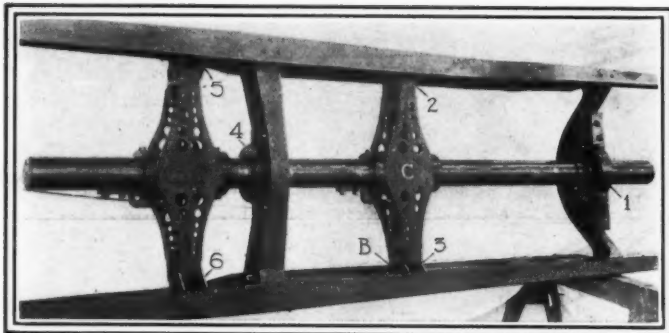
Jig introduced by Marmon company for drilling frame to mount motor and gearbox, both of which are carried on the three-point suspension system
